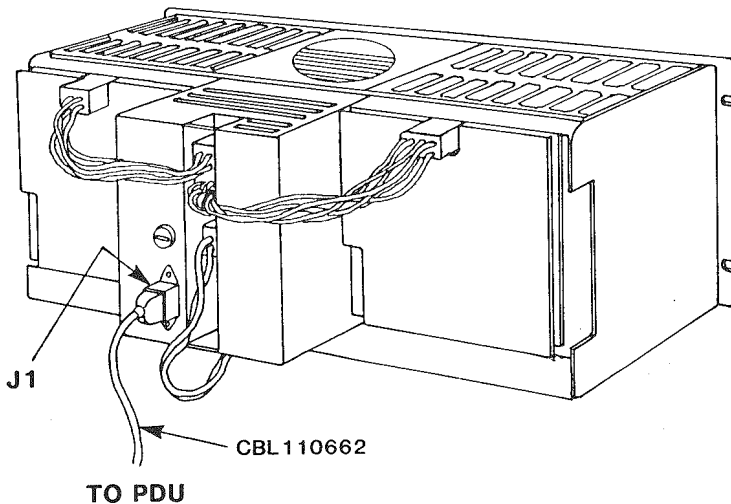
ICS3 CARD CAGE POWER CABLING
